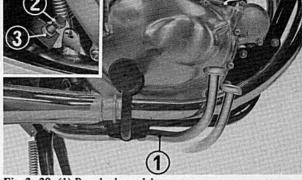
(1) Rear brake pedal (2) Pedal stop bolt
